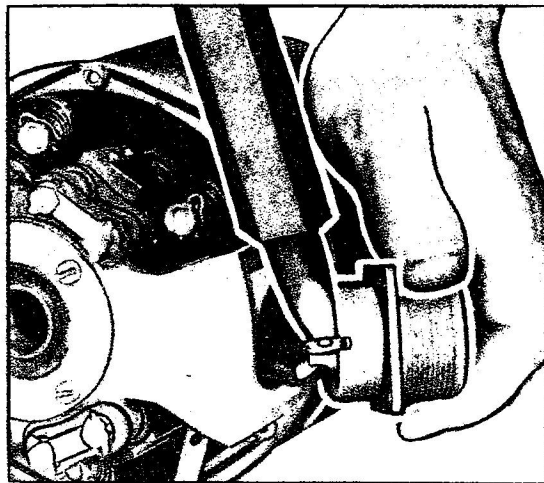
Unsoldering of Lead at "A" Receptacle Contact
